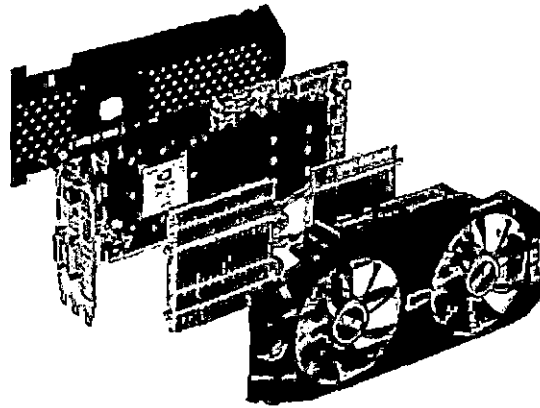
A typical non-reference style GPU cooler exploded view. Asus Inc.
